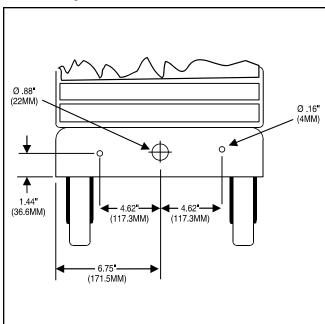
Spool Gun Connection Box Installation Mounting Holes
